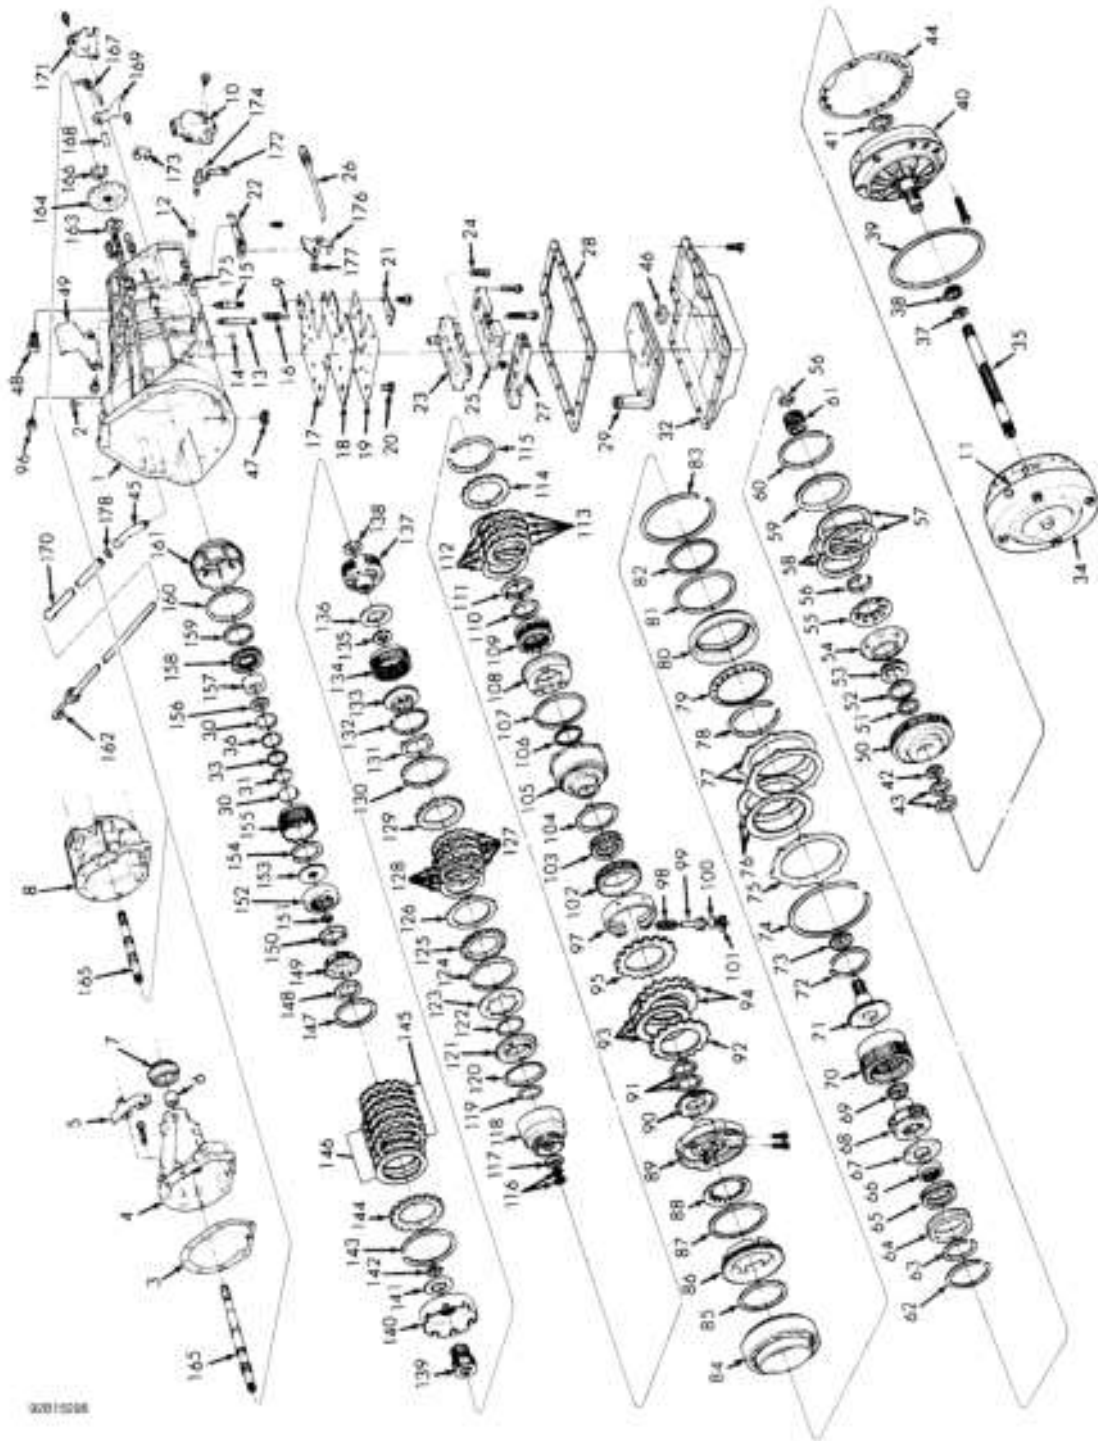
Exploded View Of E4OD Automatic Transmission (1 of 2)
